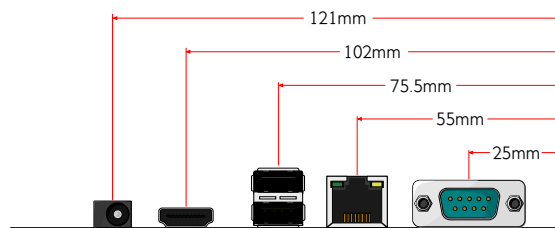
External I/O port dimensions of the VAB-630 (back panel)
